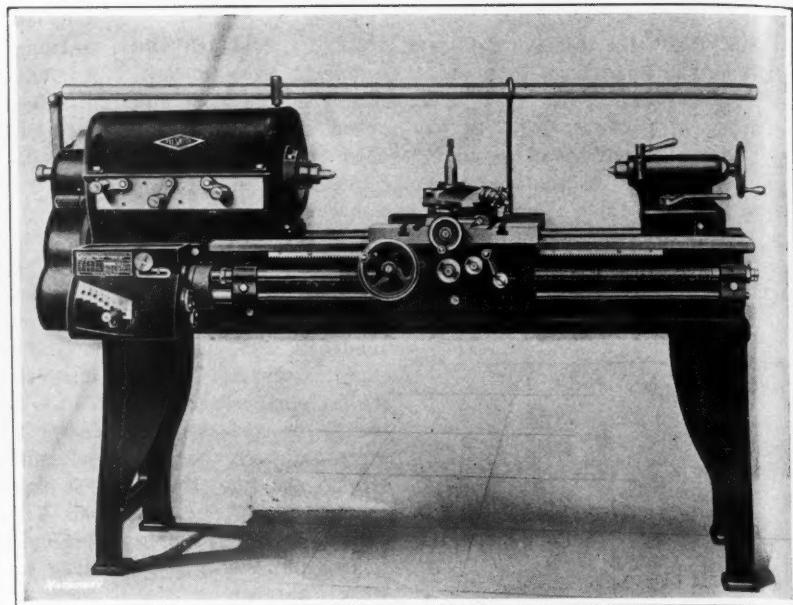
"Filsmith" 14-inch Quick-change Engine Lathe with Cone Pulley Drive
